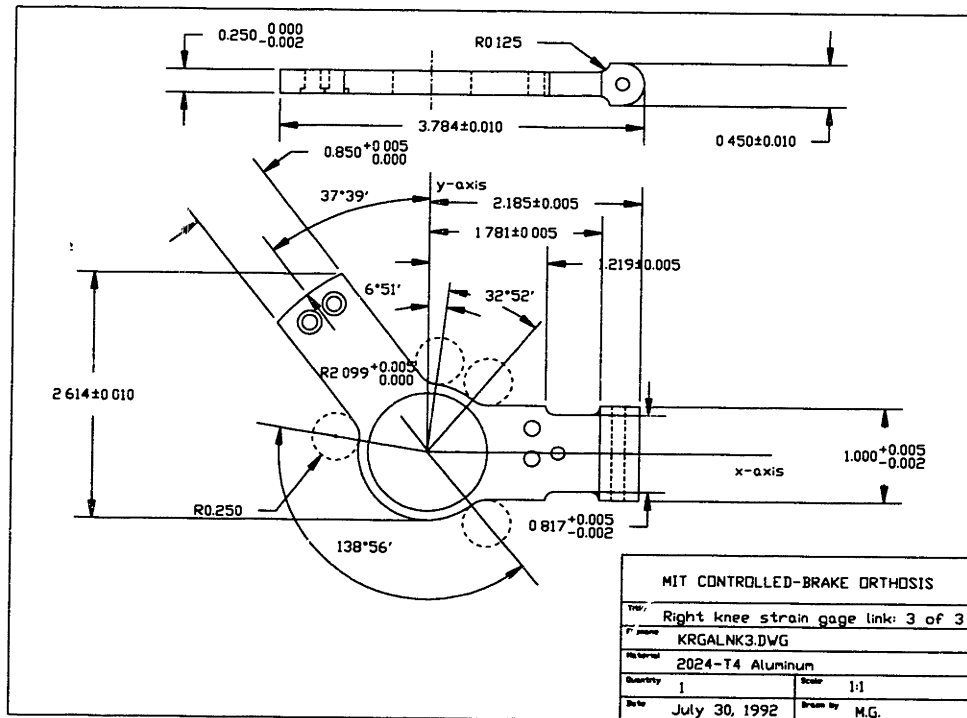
Link that couples right knee gear to the brace (drawing 3 of 3).
